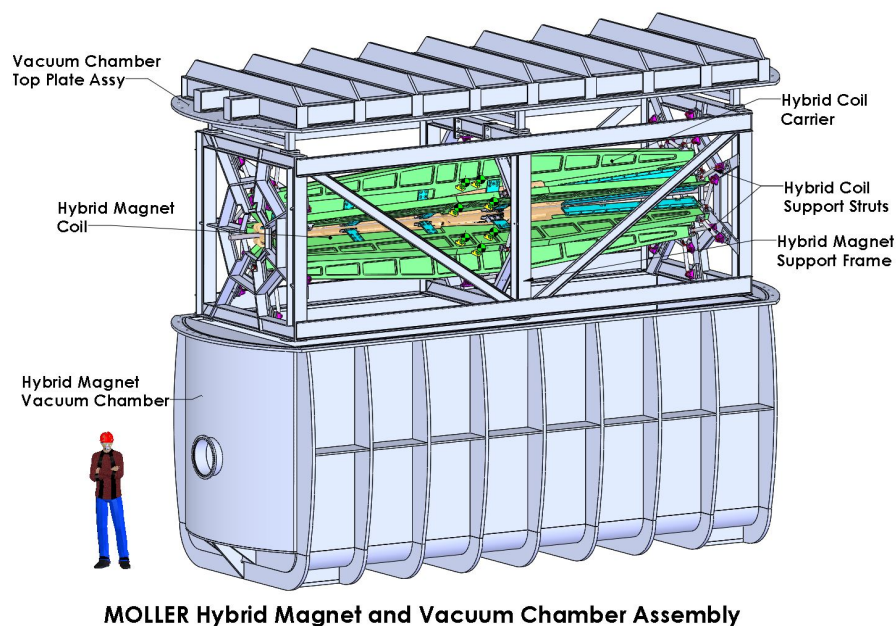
CAD drawing of the vacuum assembly for the hybrid toroid, with the lid pulled up. The hybrid assembly (coils, frames and support structure) are shown as attached to the lid.
